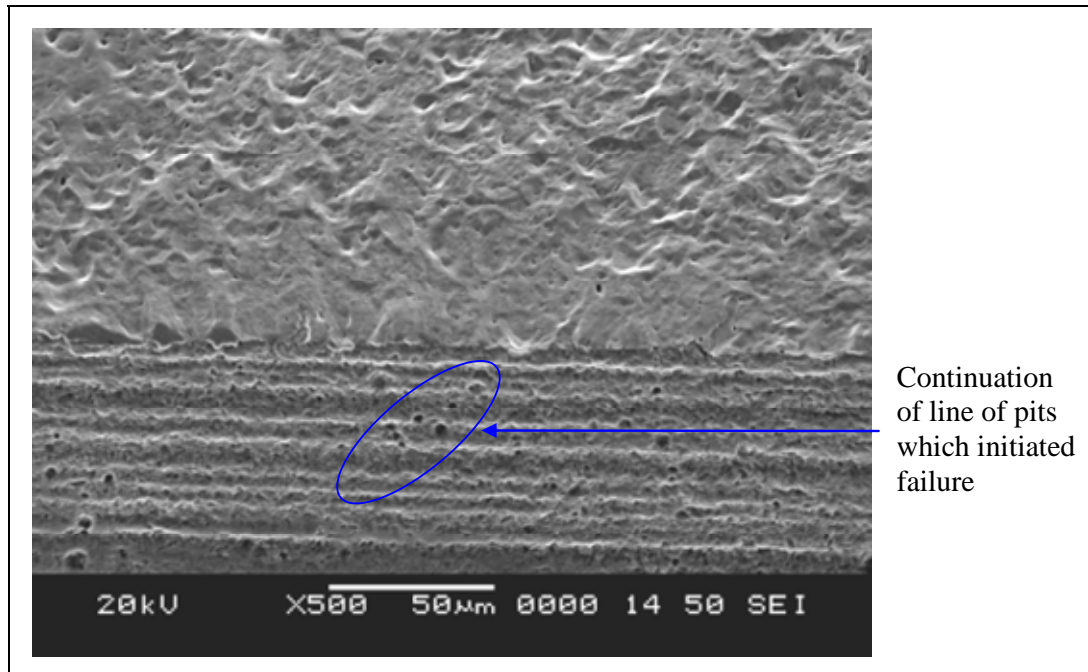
Tooth 28 drive side origin site, gear fracture half.
